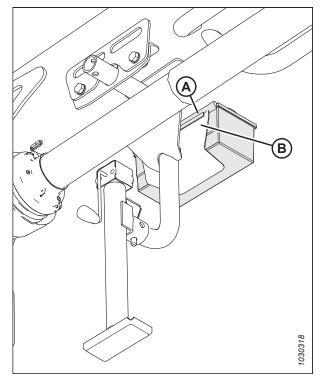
Toolbox Mounted on Jack Stand Bracket
